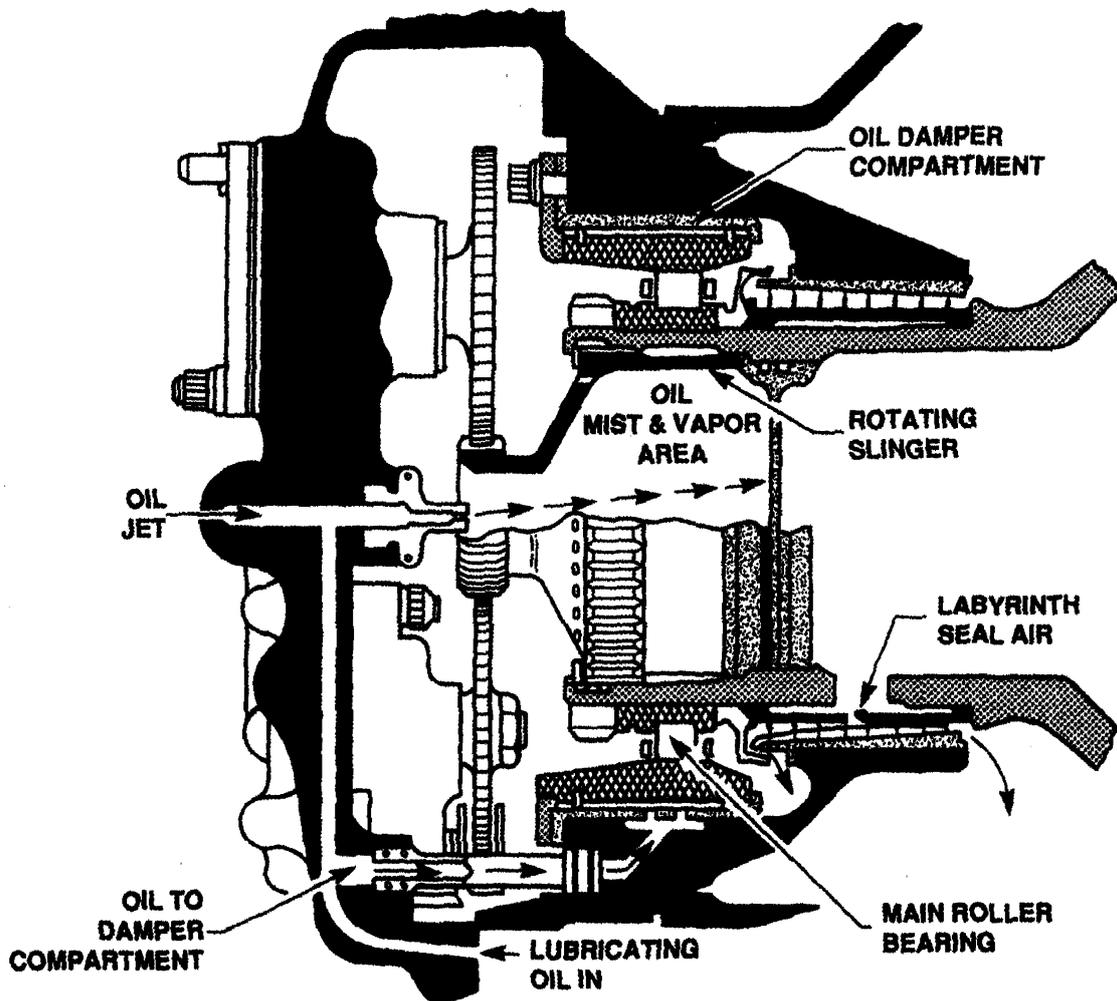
Forward compressor roller bearing with oil damped outer race
